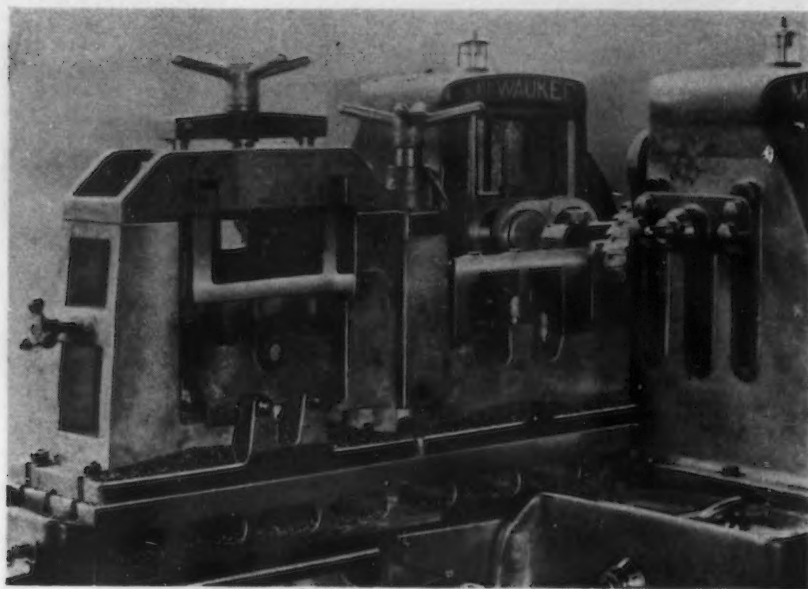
The cylinder block is held firmly by two clamps which are located in the bridge of the fixture.
